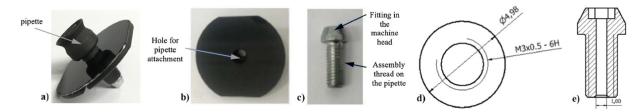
Constitution of a nozzle: a) mirror; b) pin; c) assemble nozzle; d) sketch of the cylindrical area section of the pipette tip for mirror attachment; e) sectional view of the machine connection pin.
